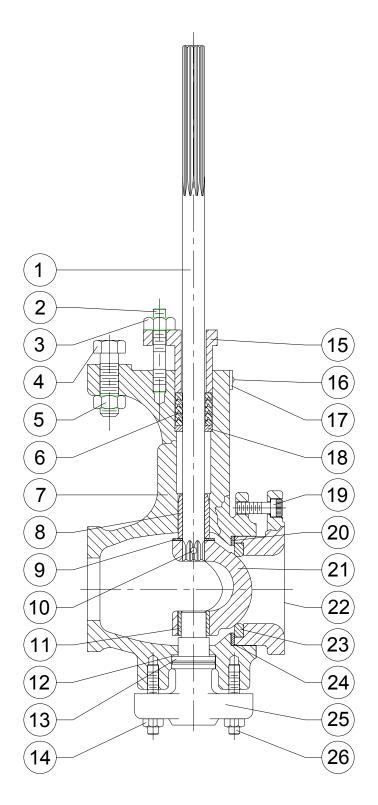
Typical Cross Section of 2-8 inch Design S&S V-100 Ball Valve
